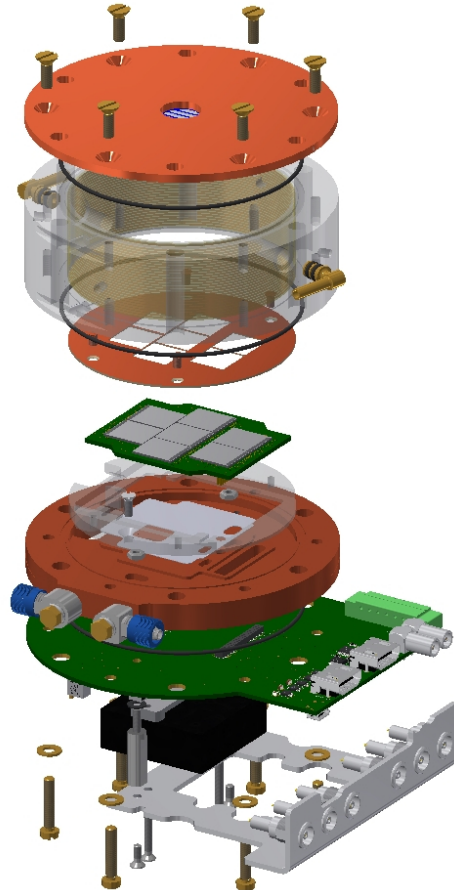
Exploded view of the main GridPix septemboard detector. The FADC and large veto scintillator paddle are not shown for obvious reasons. At the center of the detector is the 'septemboard', 7 GridPixes on a carrier board. The housing is made of acrylic glass, same as in the old detector. The top shows the 300 nm  $\text{Si}_3\text{N}_4$  window. Below the intermediate board is the water cooling made of pure copper. At the bottom, the SiPM veto scintillator can be seen.
